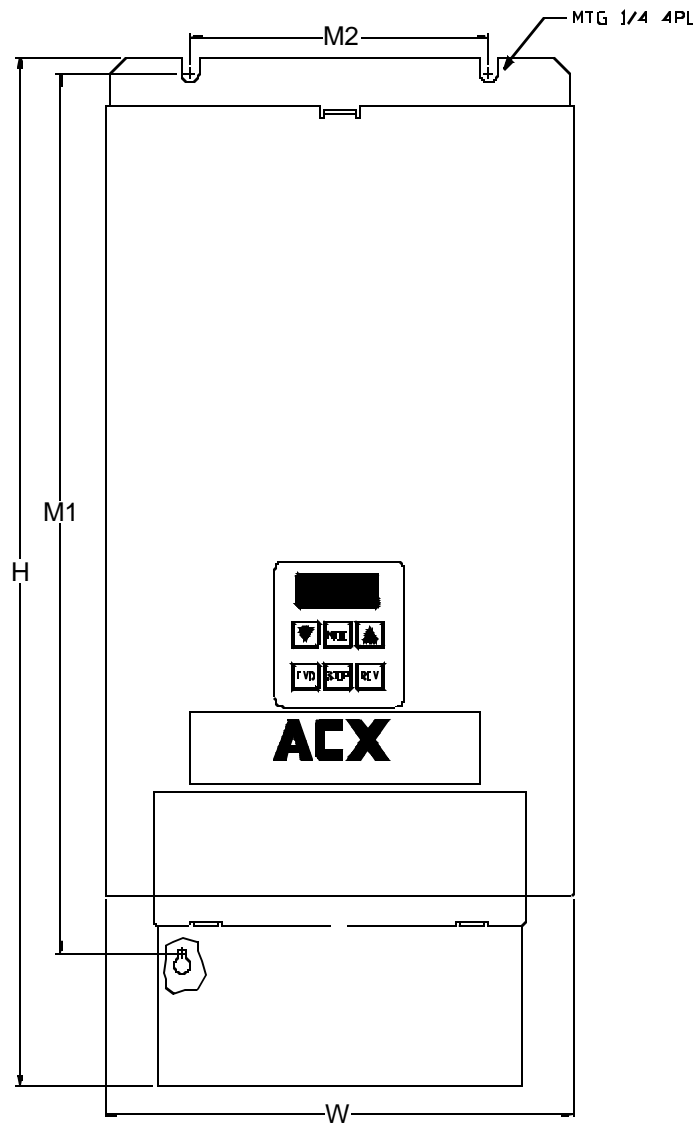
MOUNTING DIMENSIONS, 1/6 - 1HP, 230V CONTROLLERS
